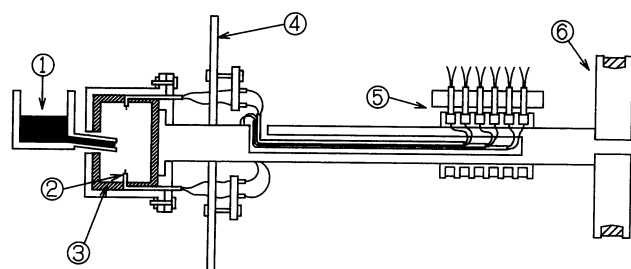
Schema of the mold and main shaft of the centrifugal caster. ① melt, ② thermocouple, ③ mold (insulation brick), ④ heat-shielding plate, ⑤ slip ring, ⑥ pulley.
